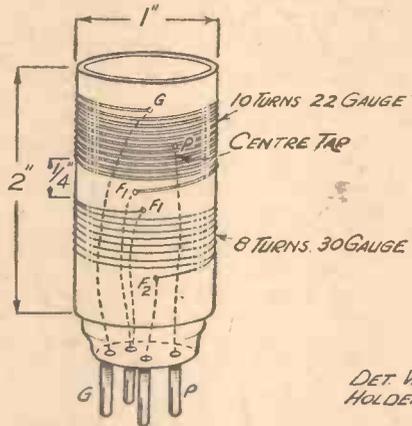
(above).—Details of a plug-in coil built on an old valve base or 4-pin adapter.
